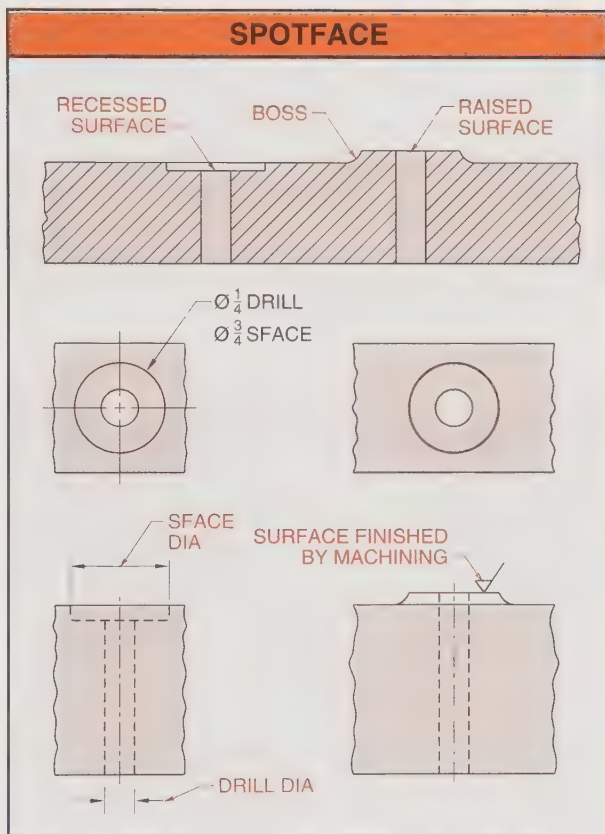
Spotfaces provide a level bearing surface for load transfer.
